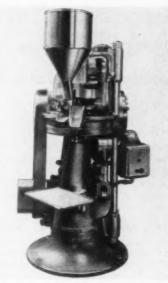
Manesty rotary machine (D3A) for tablets up to 1 in. diameter. Output 250-500 tablets per min.
